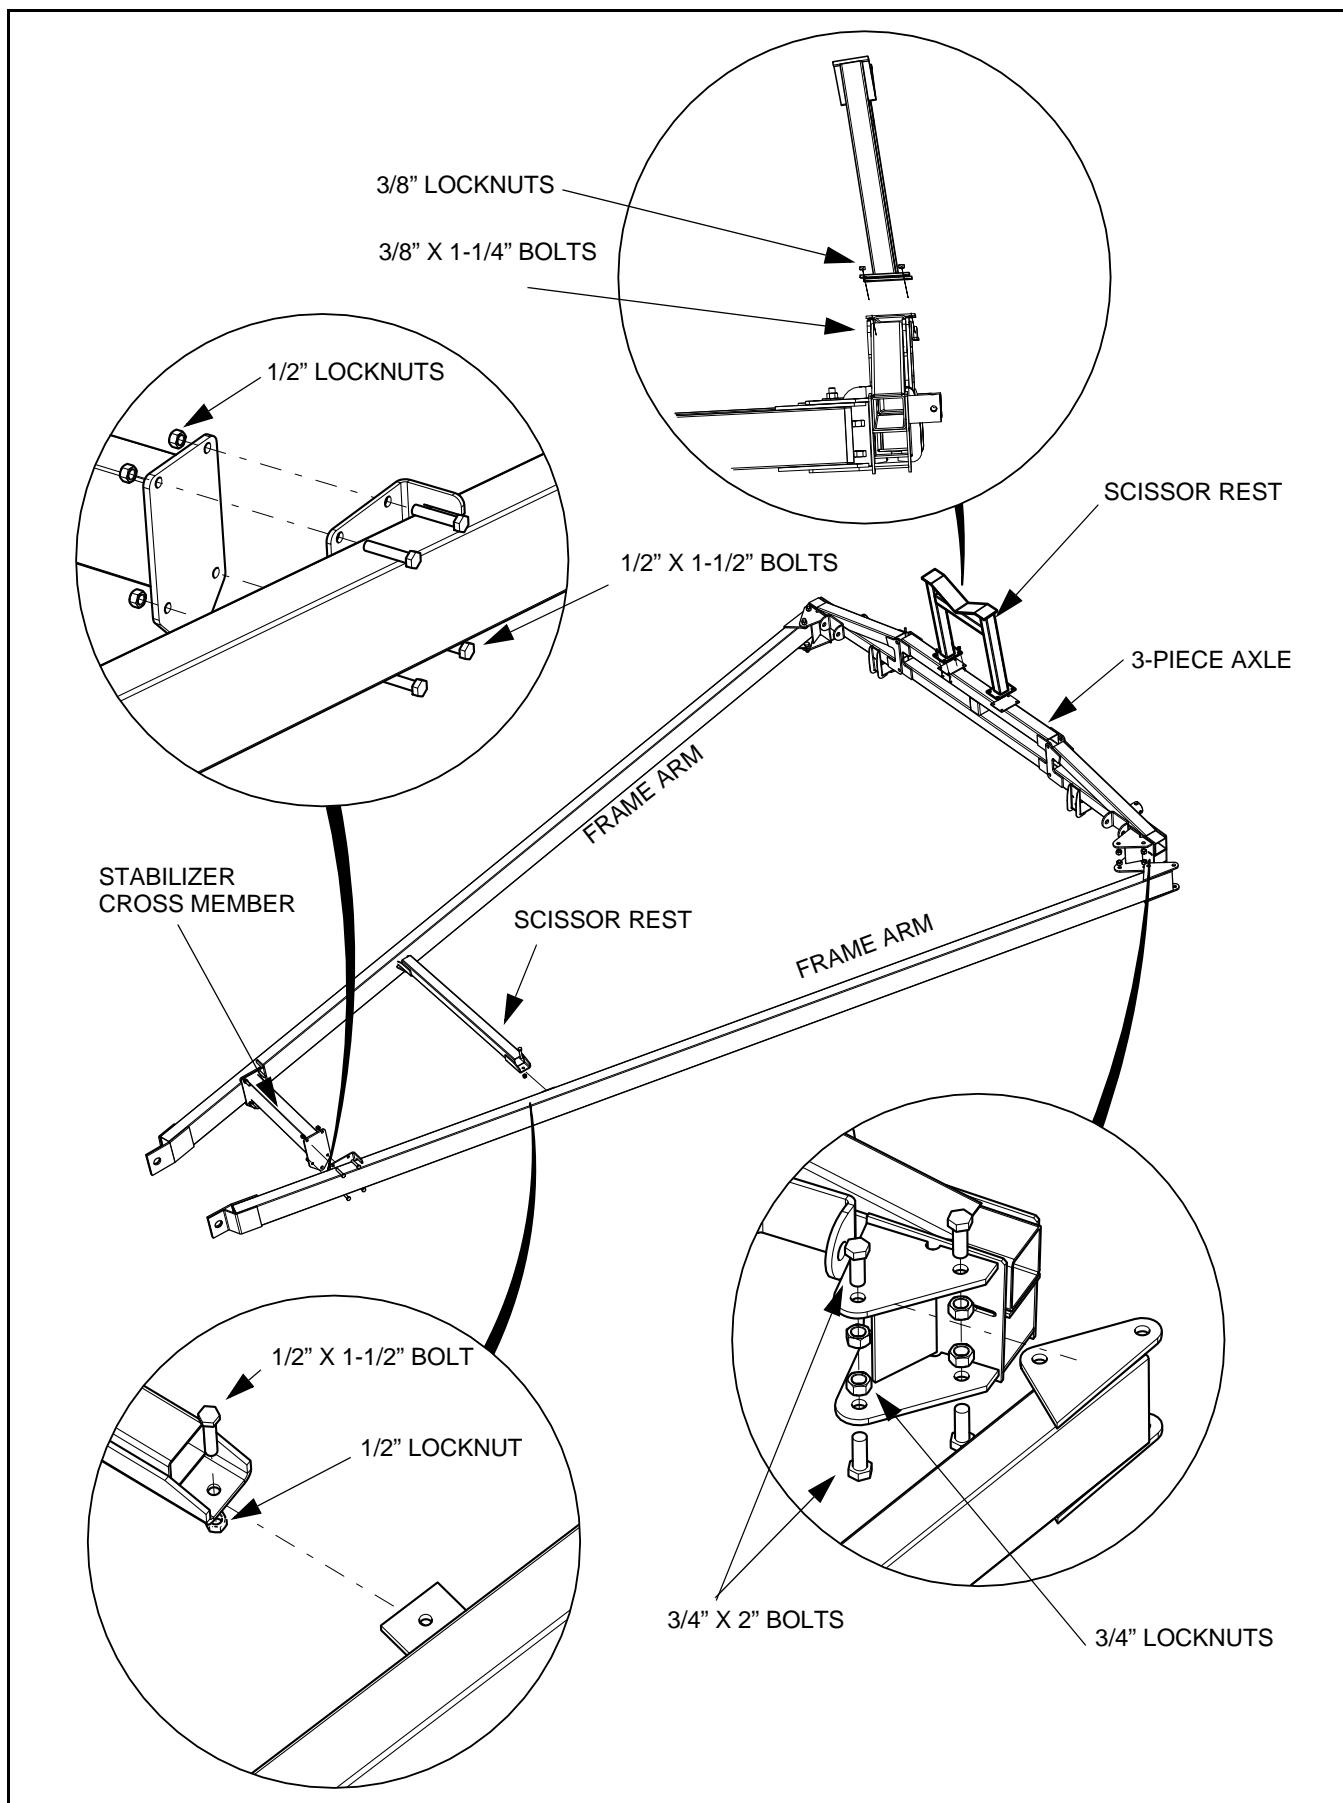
Assembling the Lower Frame Arms to the 3-Piece Axle
